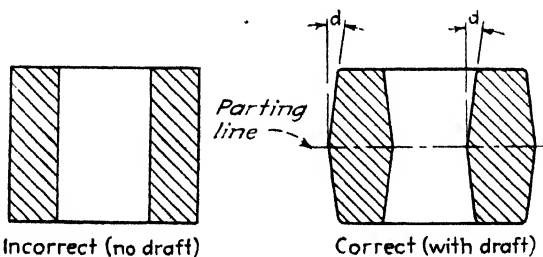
Sections of forgings as designed with draft (right) and without draft (left).
